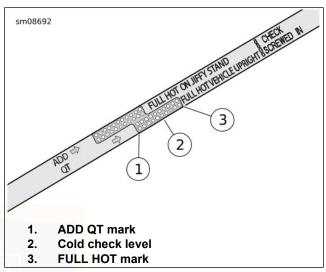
Engine Oil Dipstick (VEHICLE UPRIGHT Gauge)
